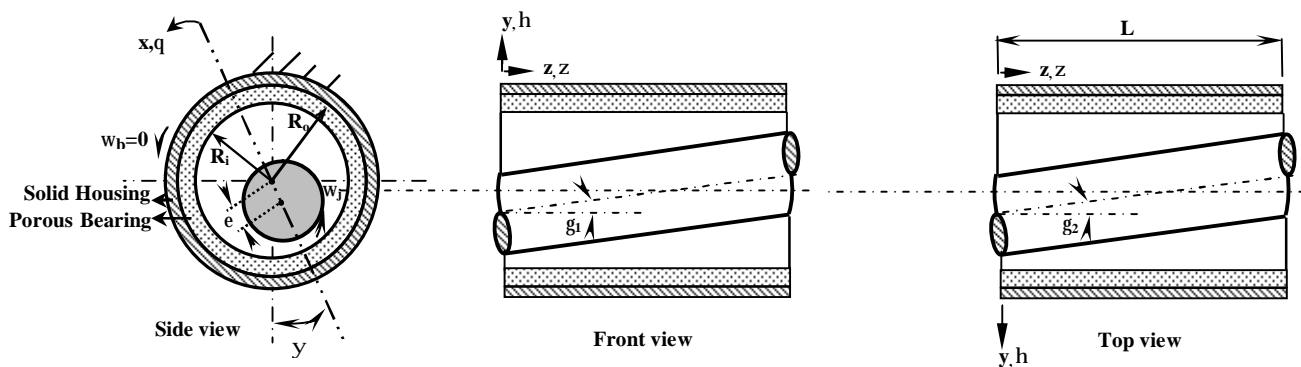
Geometrical Configuration of the Misaligned Porous Journal Bearing.
